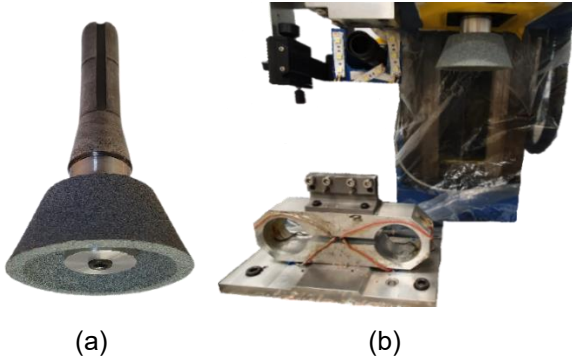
Various accessories of the experimental apparatus. (a) Grinding wheel and R8 holder; (b) Elements of the apparatus inside the atmospheric chamber.
